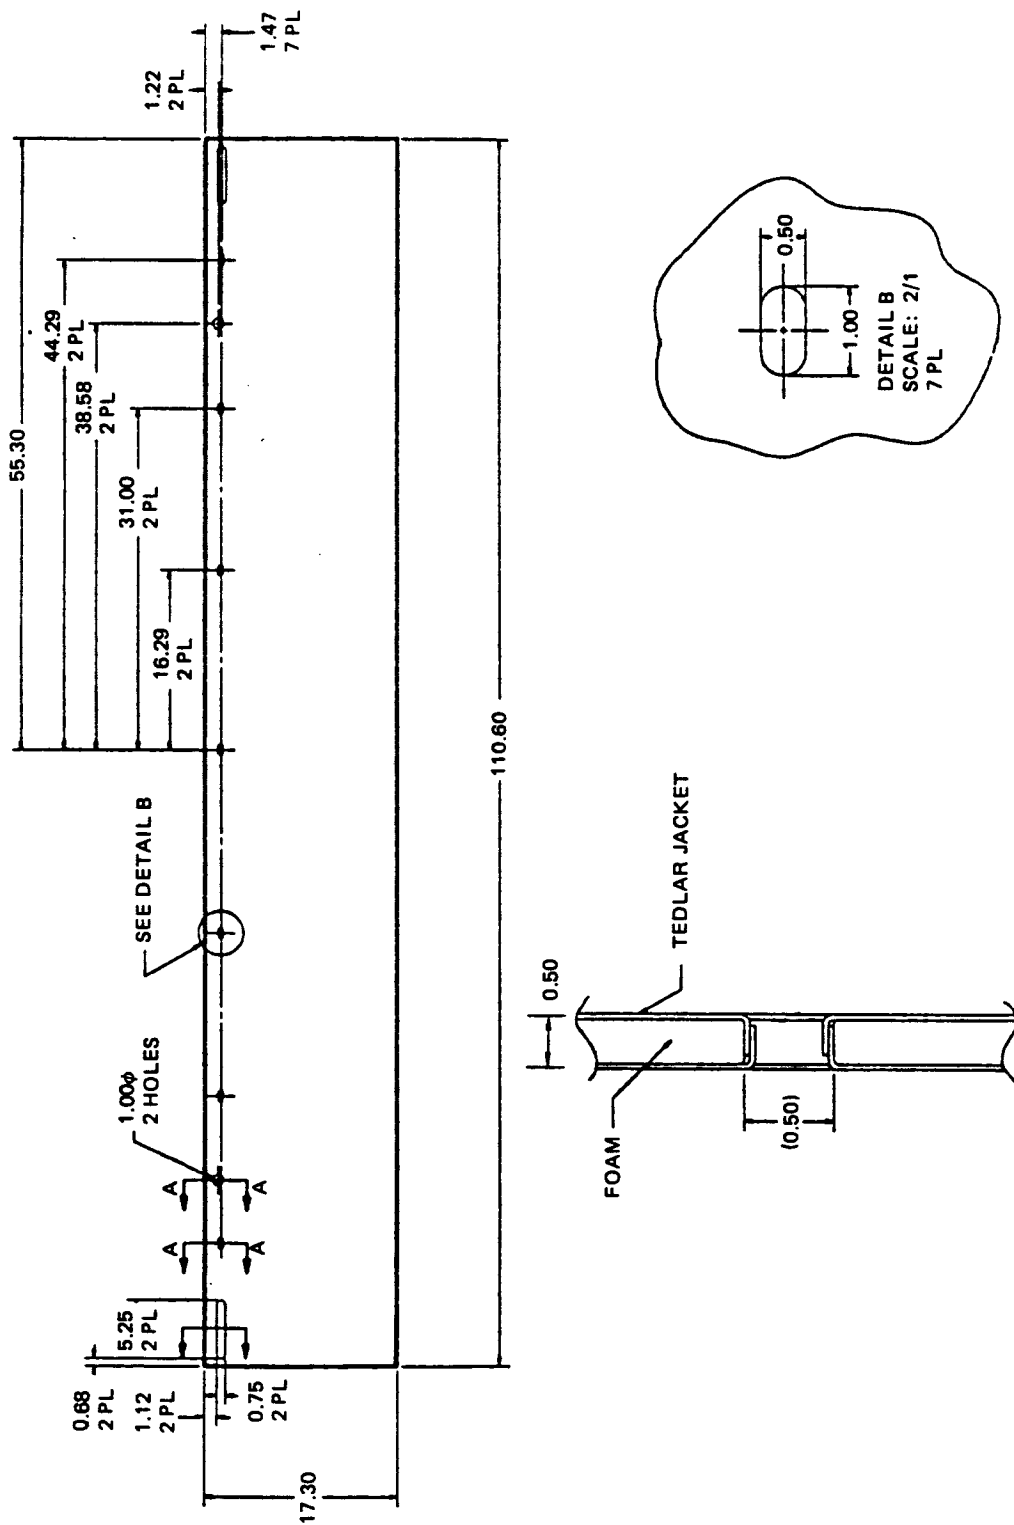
Stowed Blanket Flexible Polyimide Foam Isolation Padding Assembly
